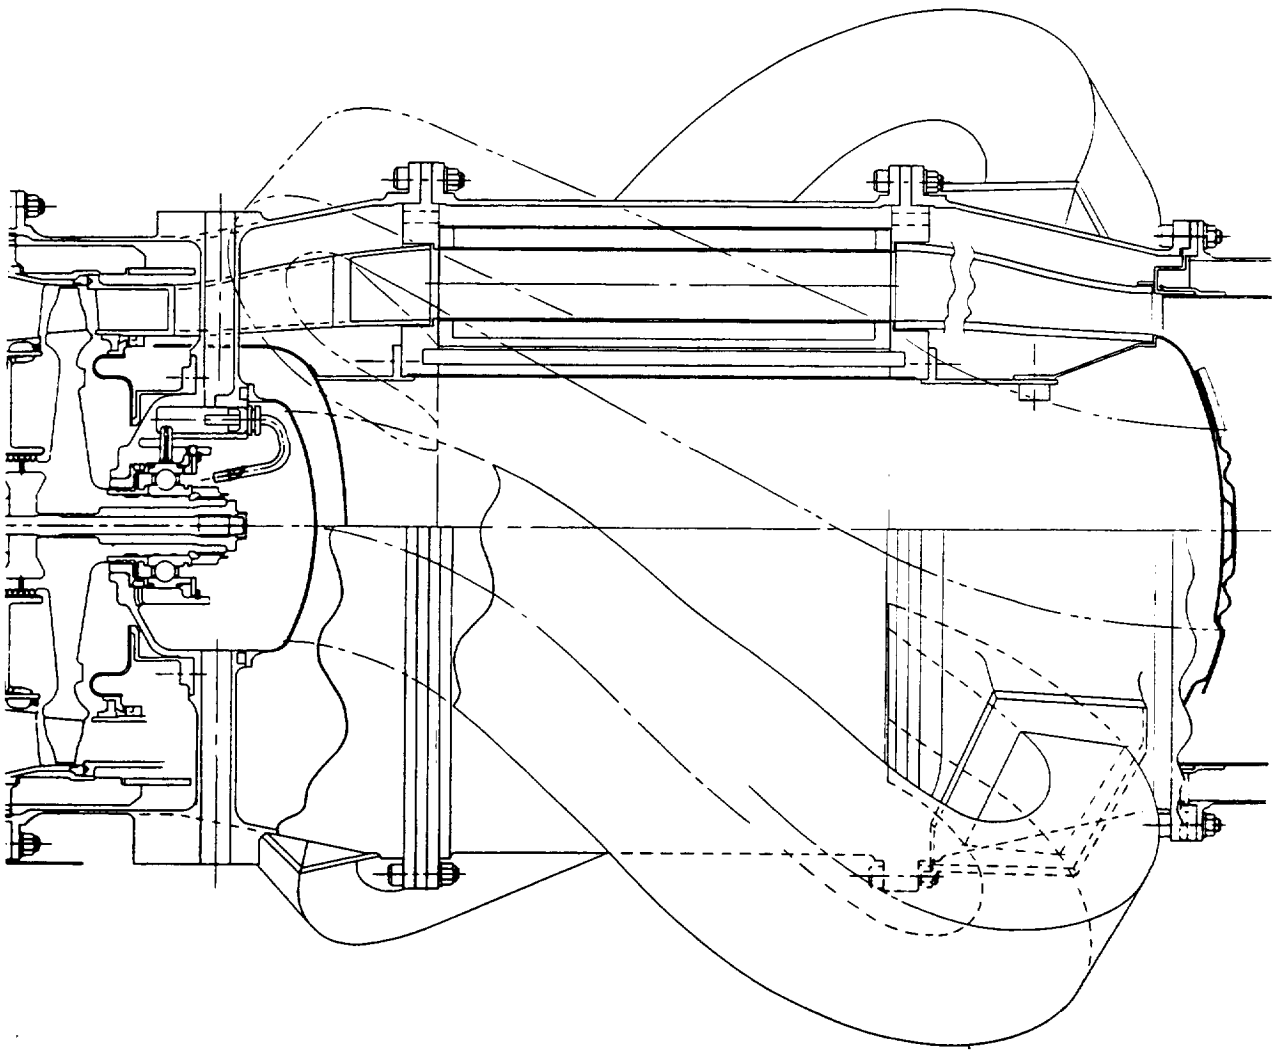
Cutaway View Of Wave Rotor Module Preliminary Design, Side View.
